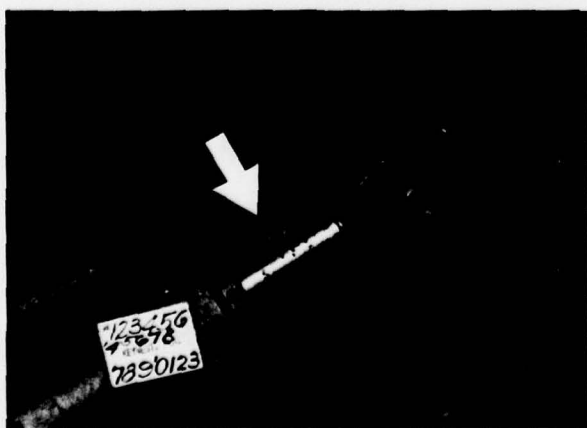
Aero 33-D Bomb Truck - Pitting Corrosion on Piston Rod
